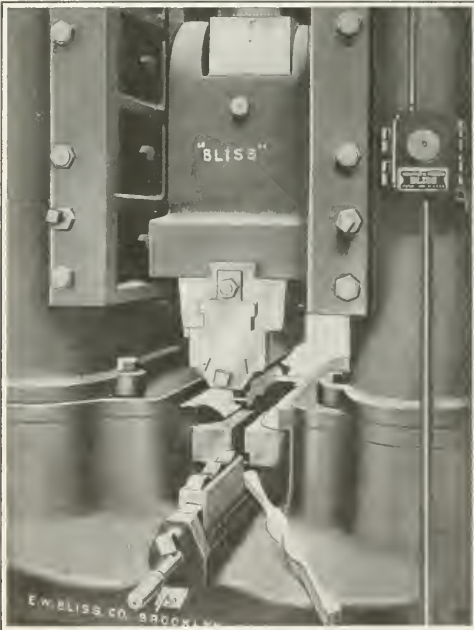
Close View of Profiling Tools with Die-holder drawn Forward
